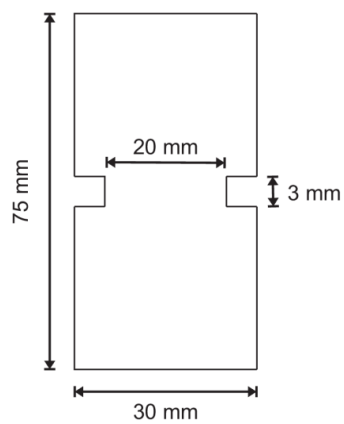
Geometry and dimensions of the specimens used for the second simple shear tests
